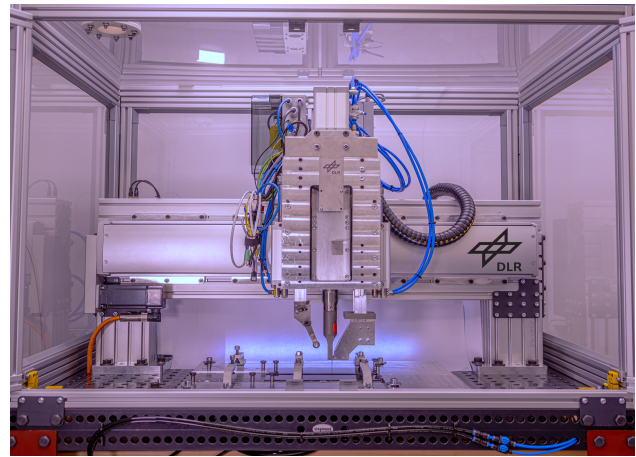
Continuous ultrasonic welding end-effector mounted to a linear axis test bench. Image modified from [24].
